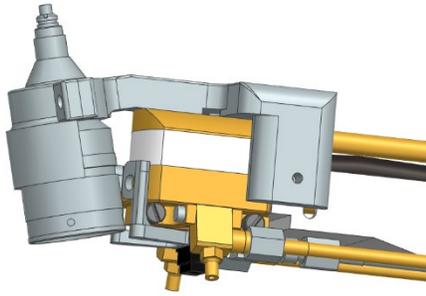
The fixture part of the CAD model of dual sensor system (without wires)
